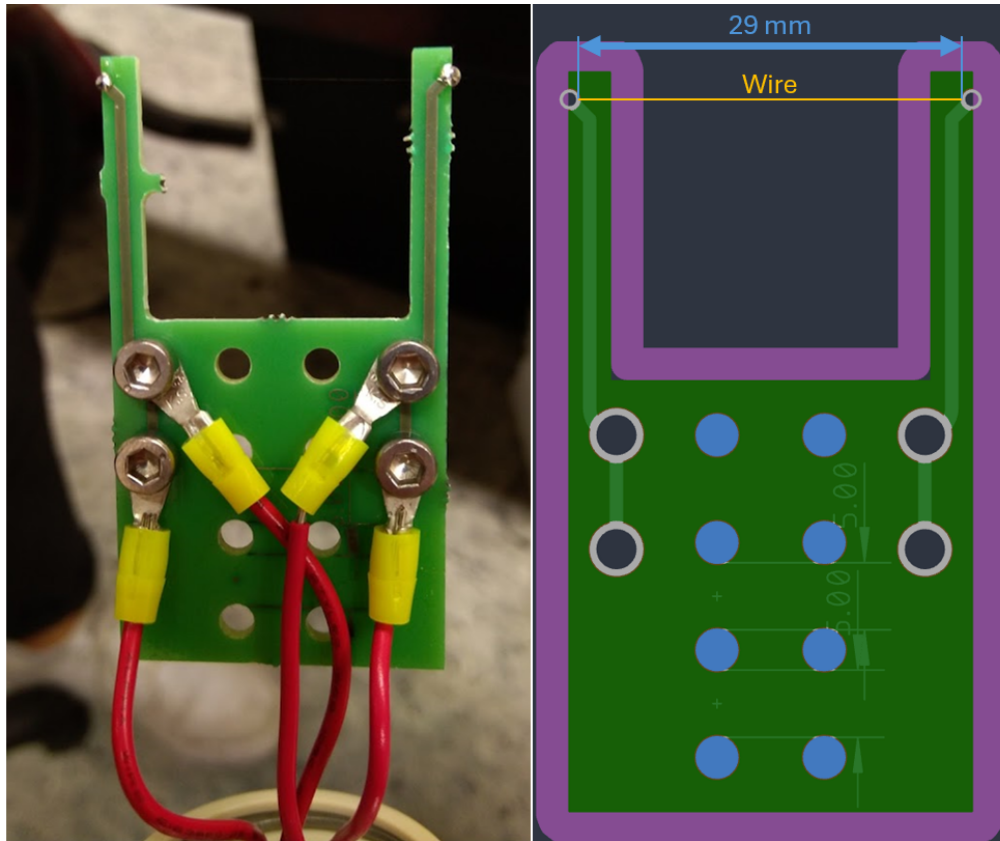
Version 2 of the assembled wire detector is pictured on the left. On the right the board schematic is displayed for clarification. The wire is soldered to the half open vias at the top of the board, such that it spans the cutout in the PCB. The length of the wire on this board is 29 mm. At the bottom of the board ring terminals are used to attach the wire leads for current supply and voltage measurement.
